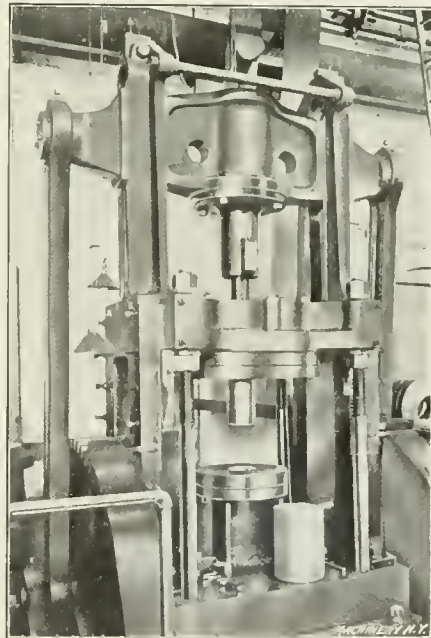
The "Jumbo" Drawing Press built Fifty Years ago
